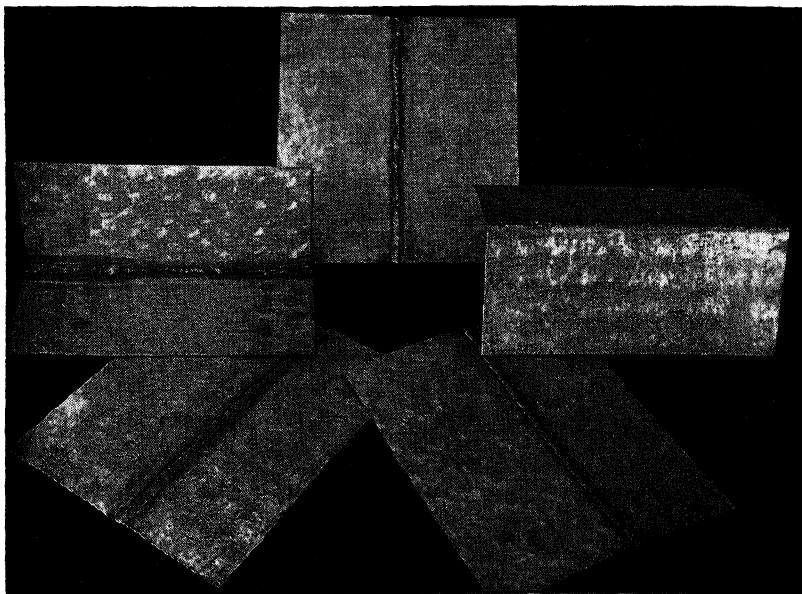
Galvanized sheets welded by the carbon arc process.
